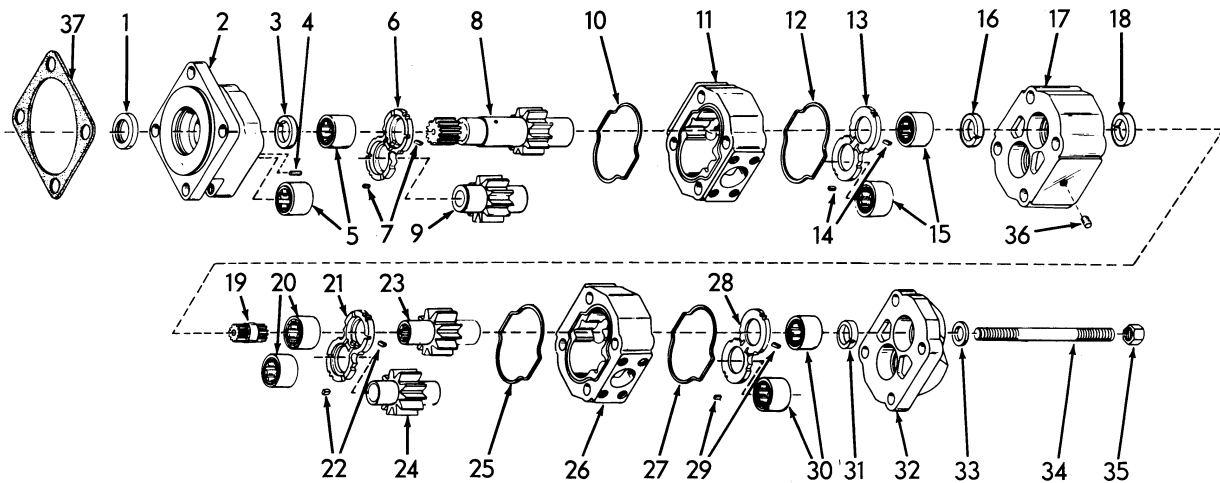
IMPLEMENT/STEERING PUMP (FR10,12)
